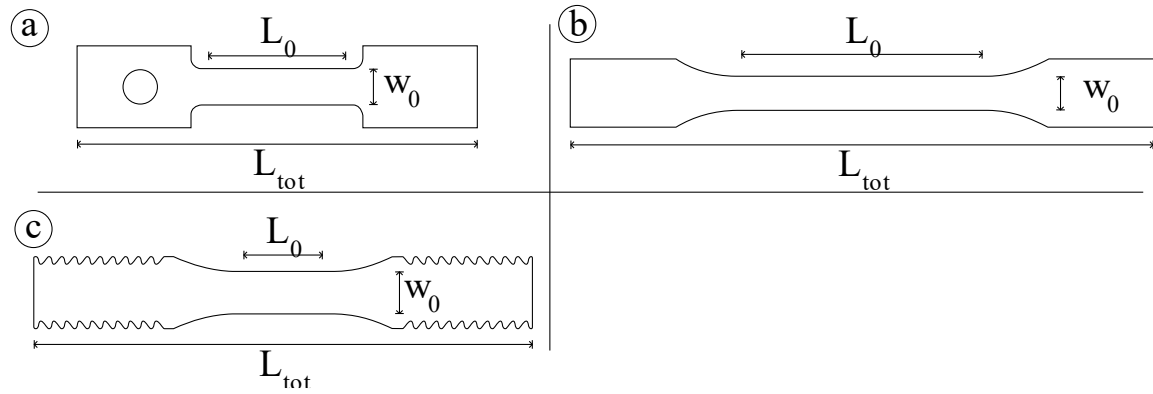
Tensile specimen geometry and main dimensions for all tests performed in Part II of this thesis. Specimen (a) was used in two different configurations, with or without the hole shown on the left side.
